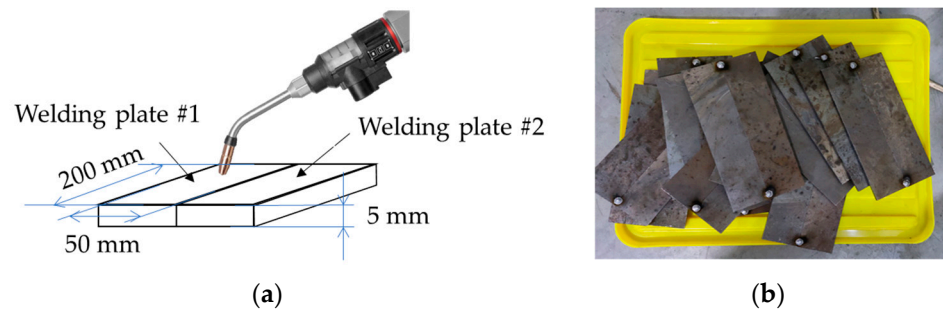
(a) Schematic diagram of size of welding plates and weldment, and (b) preparation of welding plates.
